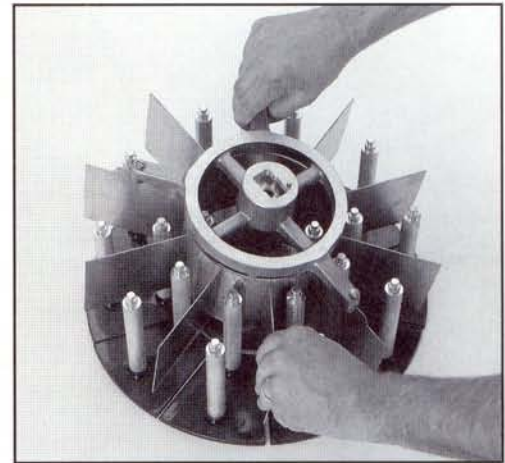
While holding Handle down with one hand, with the other hand rotate Head Assembly? turn until Head Assembly releases . . .
